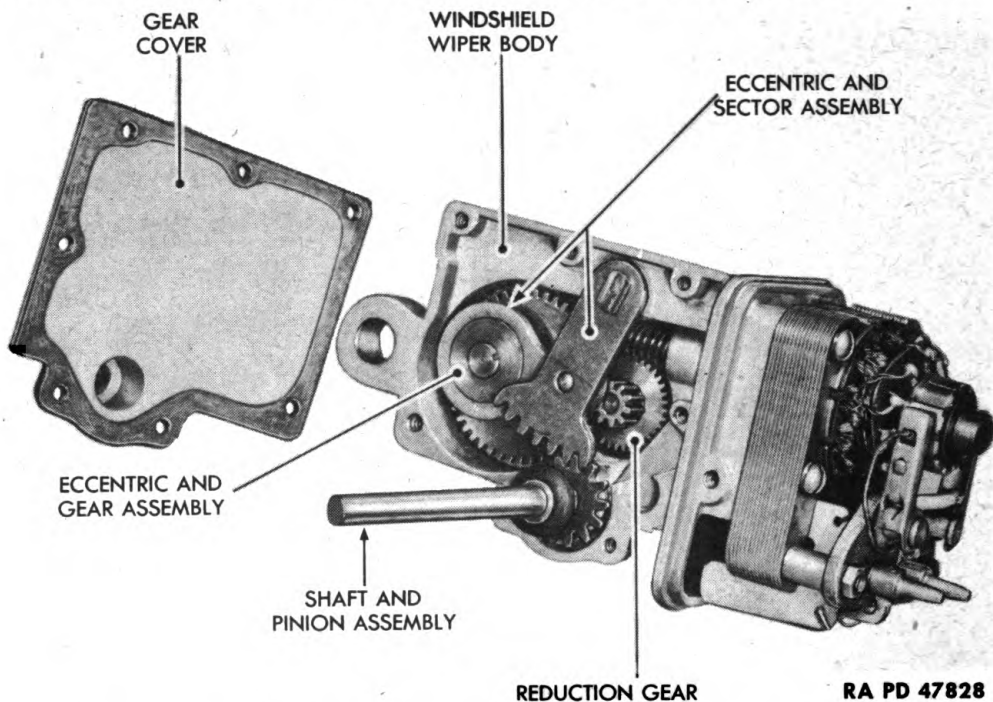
Windshield Wiper Motor Housing and Gear — Cover Removed
